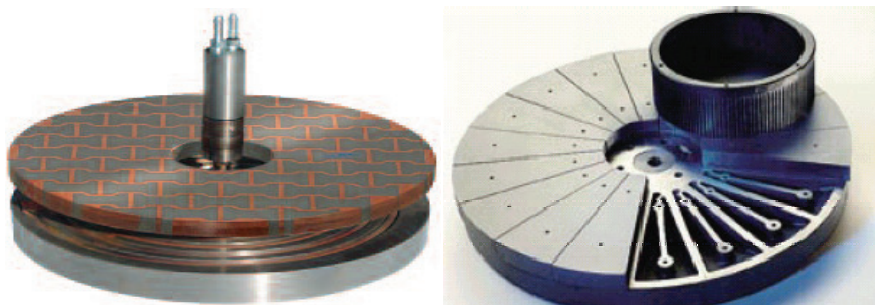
Water cooled wheel; a) manufactured by LAMPLAN, b) manufactured by PETER WOLTERS [11, 12]
